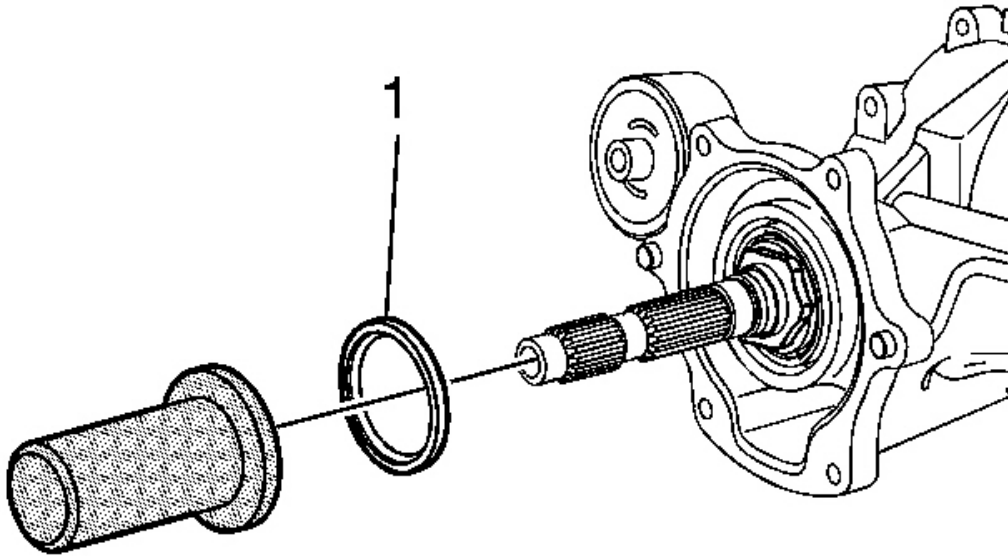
Installing Clutch Drum Rear Oil Seal Using J44853
